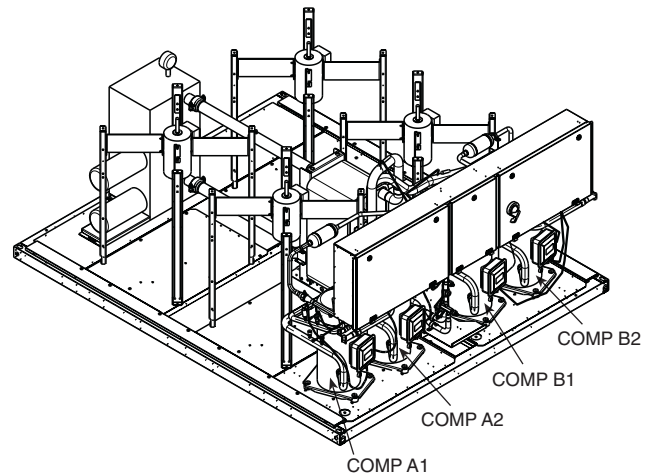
Typical Compressor Mounting — All Sizes
